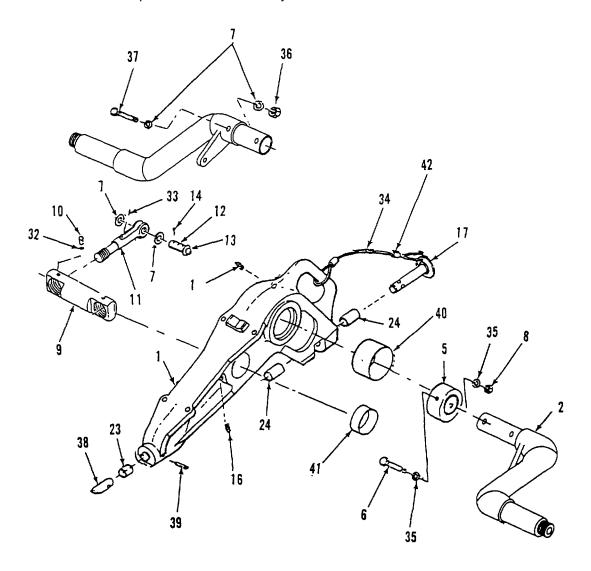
Cradle Assembly, Model 1730-EG-100
